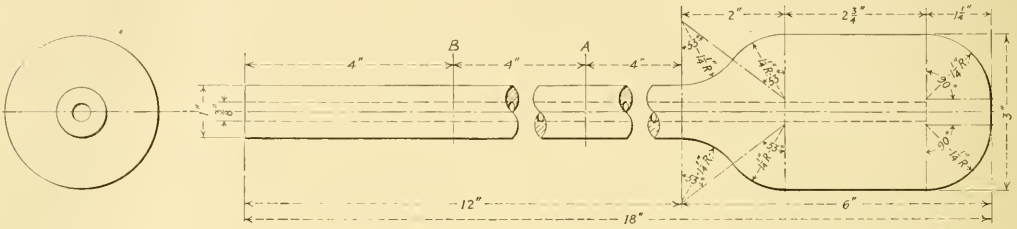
TEST PIECE USED IN QUENCHING TESTS
